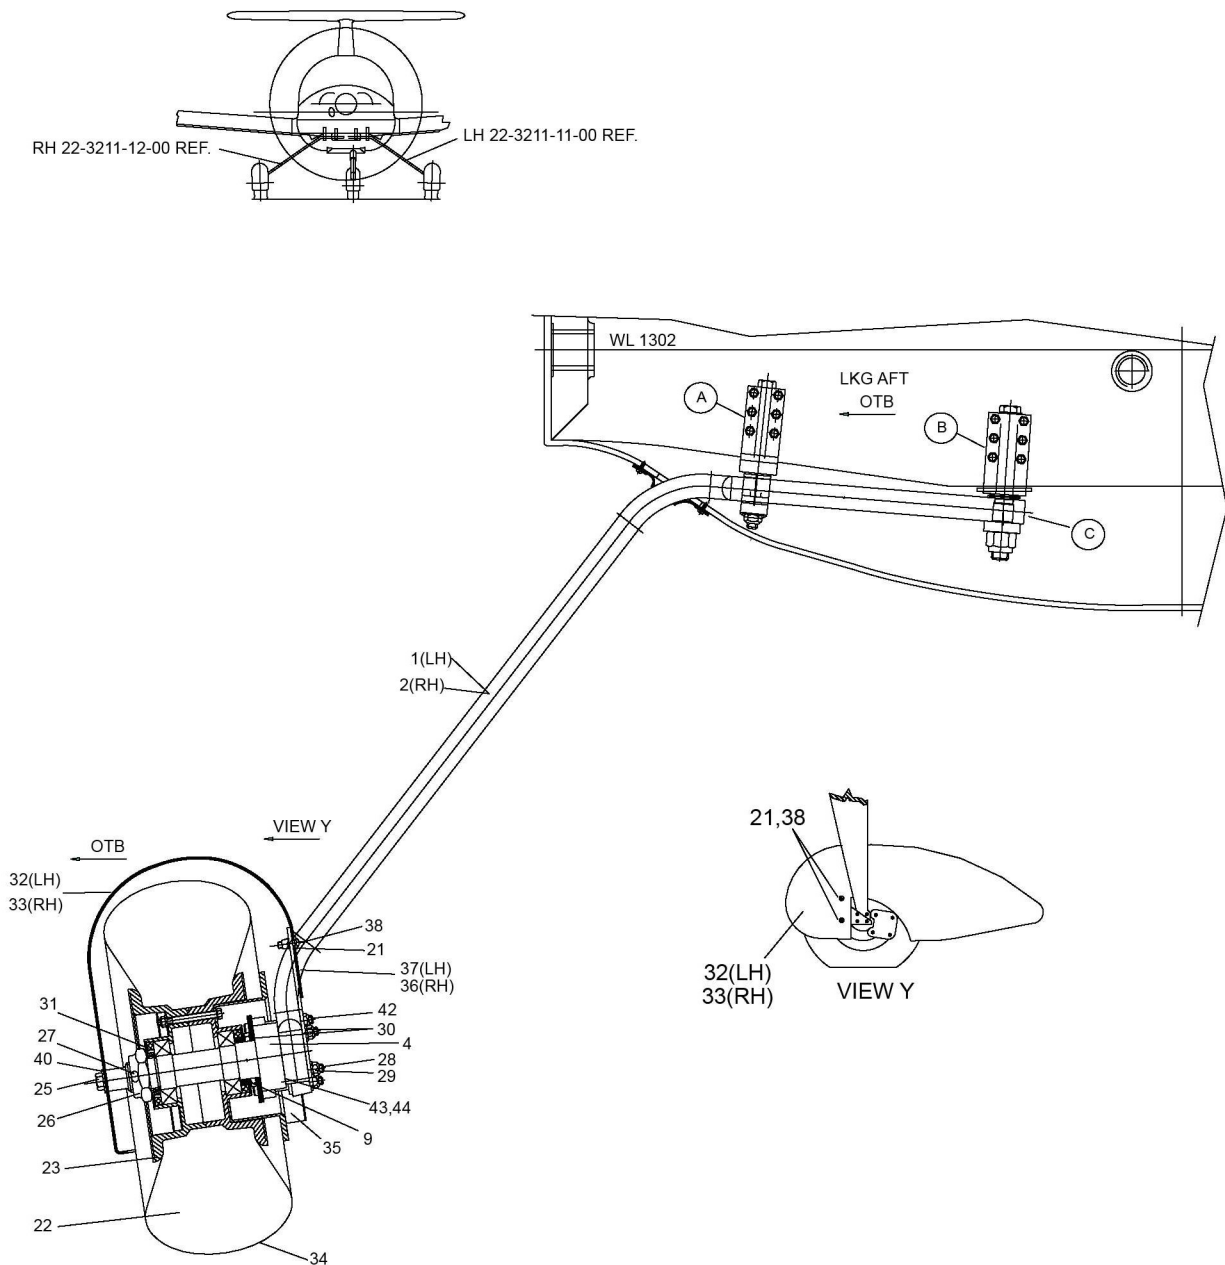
, Sheet 1 - Aluminum Main Landing Gear
